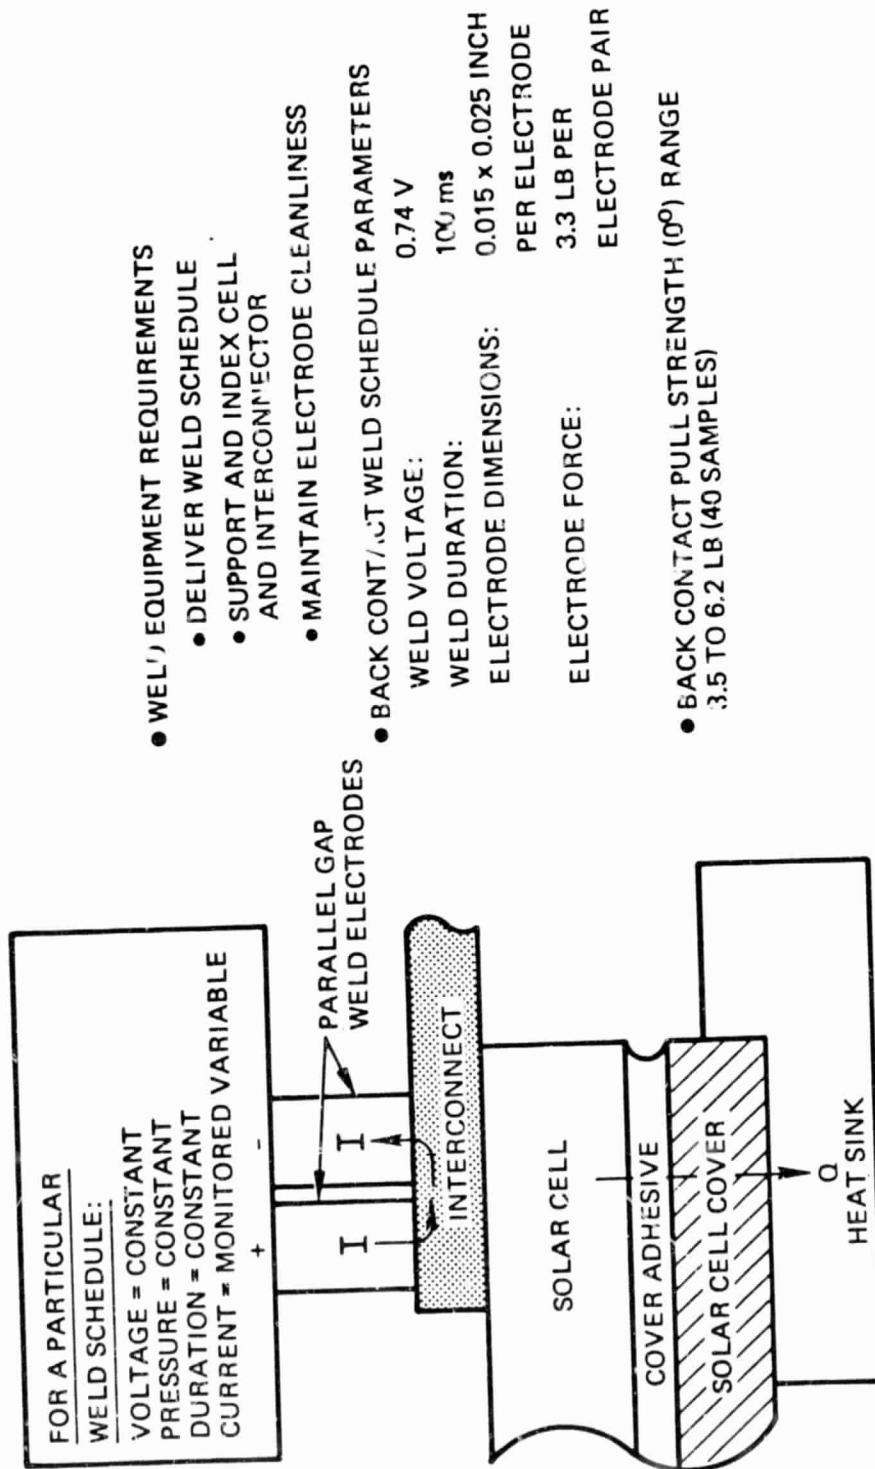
Back Contact Weld Schedule Summary
